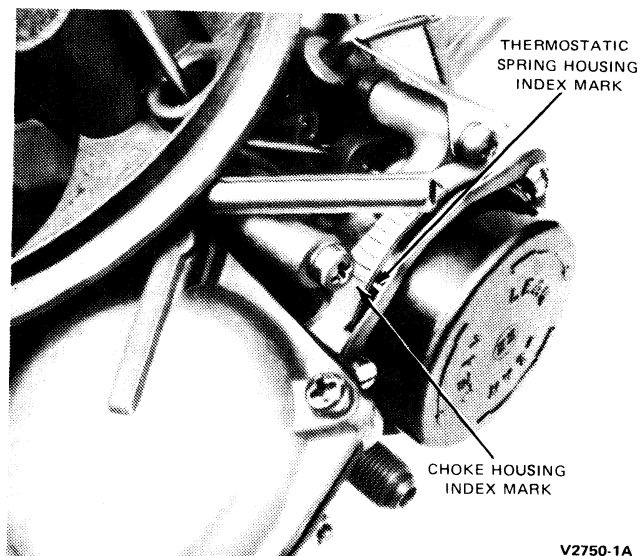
Automatic Choke Thermostatic Spring Housing Adjustment
